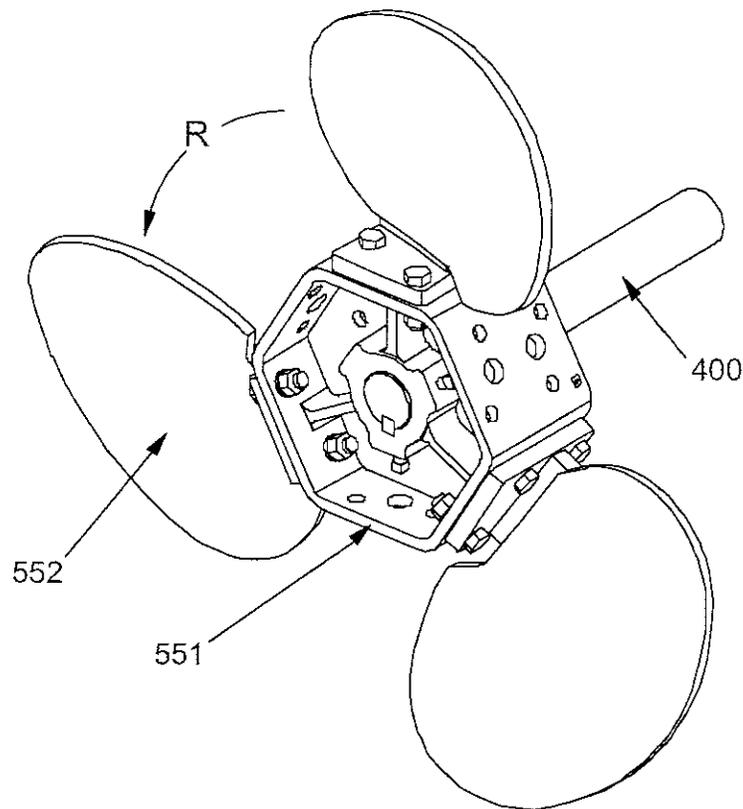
Maxflo Mark II Impeller (Bolted Blade Shown)
